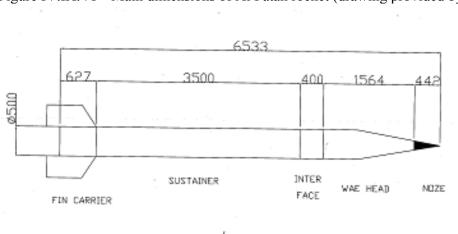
Figure IV.IX.VI - Main dimensions of Al Fatah rocket (drawing provided by Iraq)
